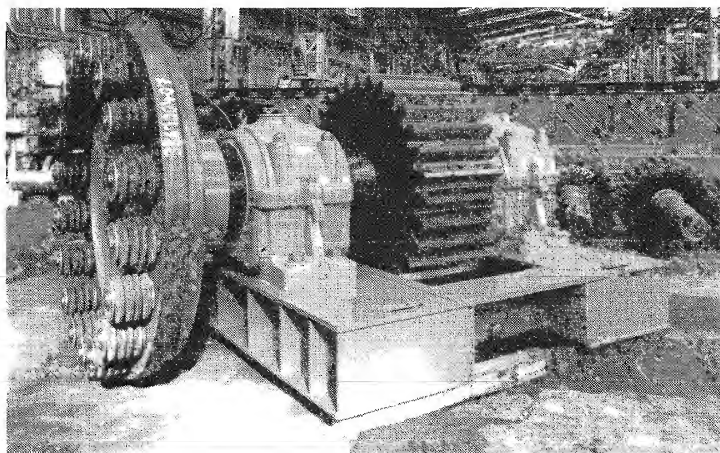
Kiln drive pinion and mounting (KHD Humboldt Wedag AG, Cologne)
